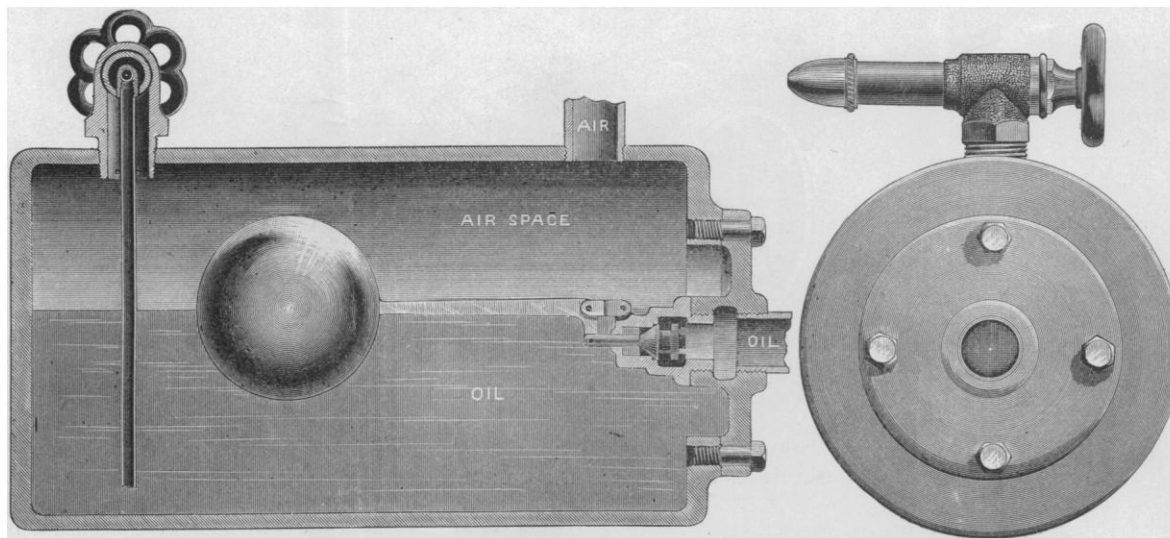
AERATING CYLINDER FOR PETROLEUM BURNER.
